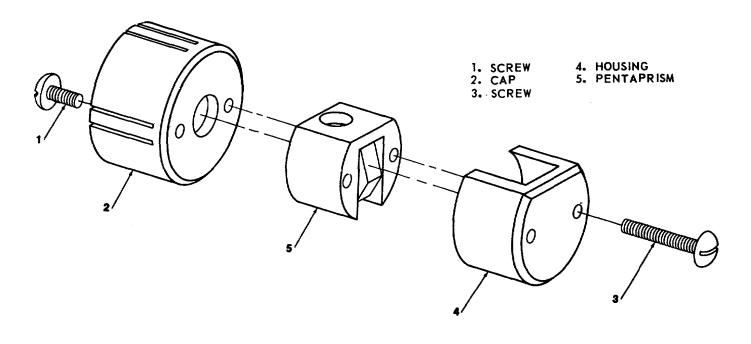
Microscope prismatic eyepiece, exploded view.
